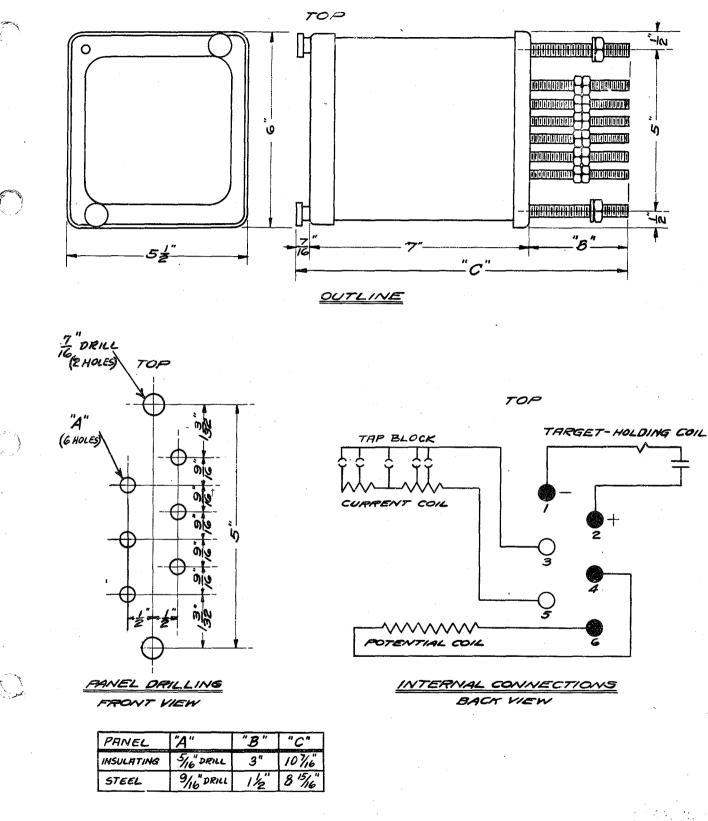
FIG. I OUTLINE & PANEL DRILLING FOR DRAWOUT CASE. ONE-UNIT, SINGLE-END.
